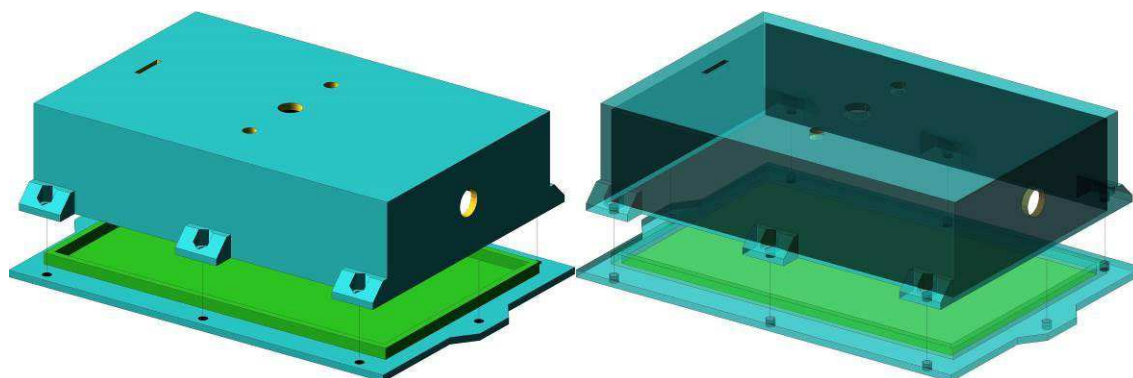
3D-printed box to enclose the main electronic part of Prototype 1.0, as a solid (left) and an X-ray (right) CAD model.
